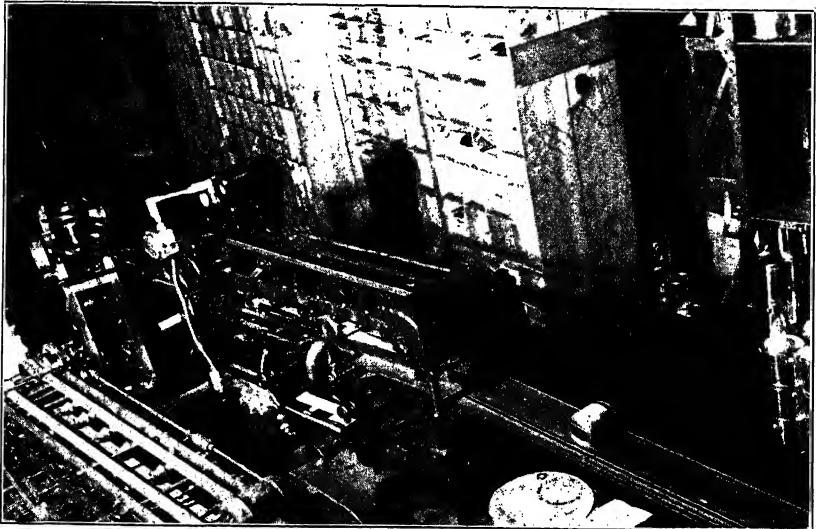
Installation Showing Two Labeling Machines Fed from One Conveyor Line.
